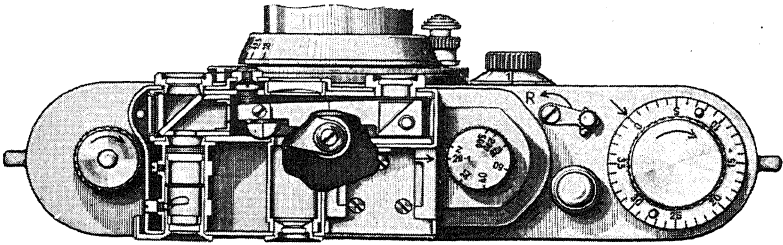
Looking down on cross-section view of range finder and view finder housing. Note position of range finder prisms, the right prism is moved by the bar which contacts the flange of the rotating lens mount.
